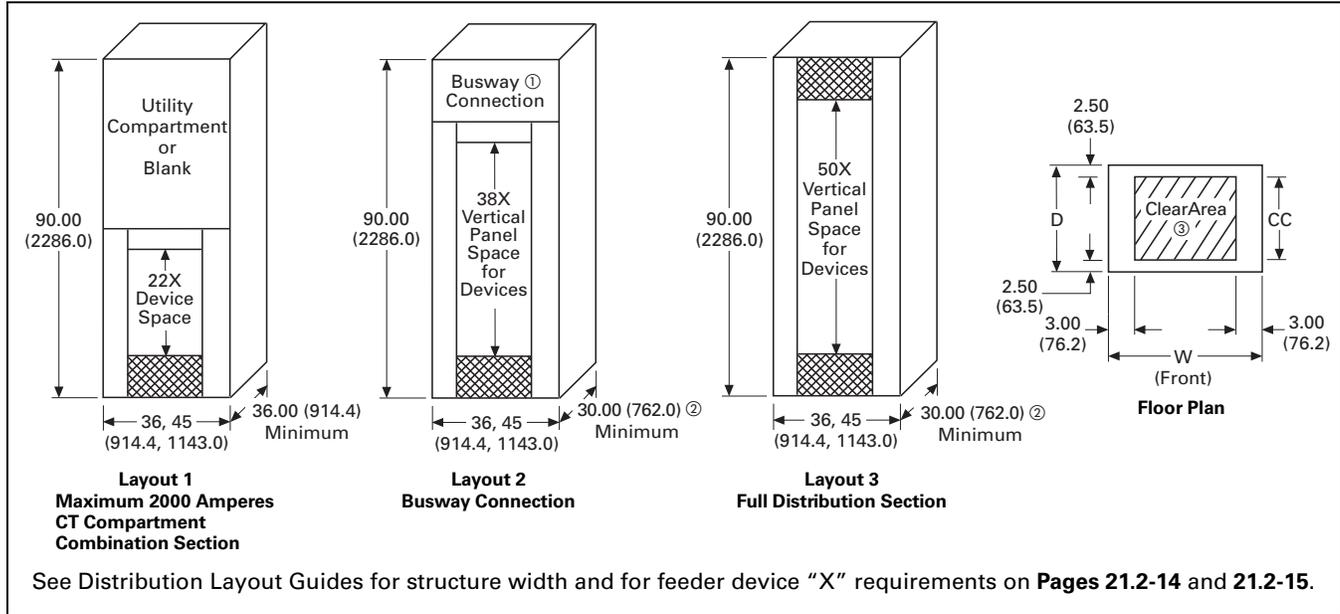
Distribution Section Layout—Dimensions in Inches (mm)
